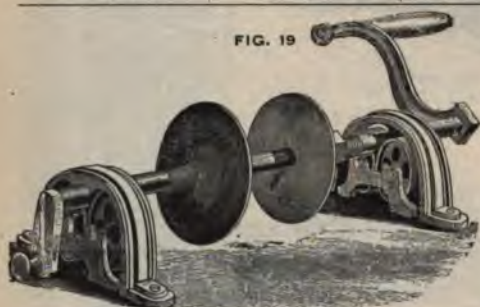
is a cast-iron grindstone shaft for hand or foot power. The bearings are turned rolls.
